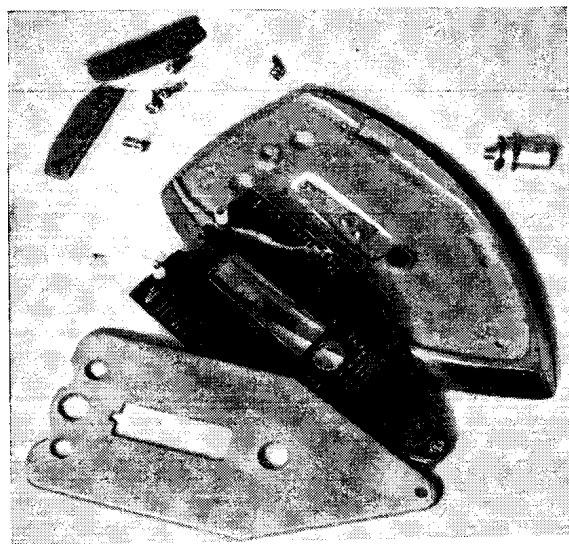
Tape-wound 800W element is secured under cast clamp-plate. Bi-metal thermostat strip is fastened by two screws to centre of sole-plate
